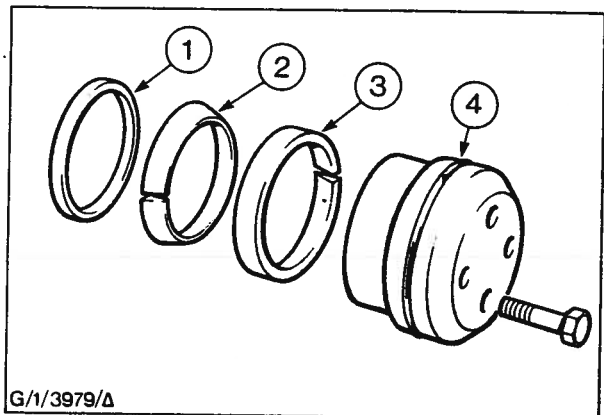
Crankshaft Pulley Retaining Components - 6 Cylinder Engines (Ringfeder Locking Mechanism)
